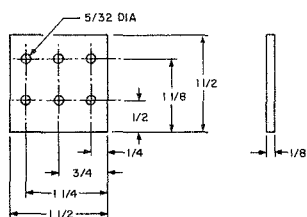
Teflon insulator construction. Use the drill guide and a block of wood when drilling this material.
